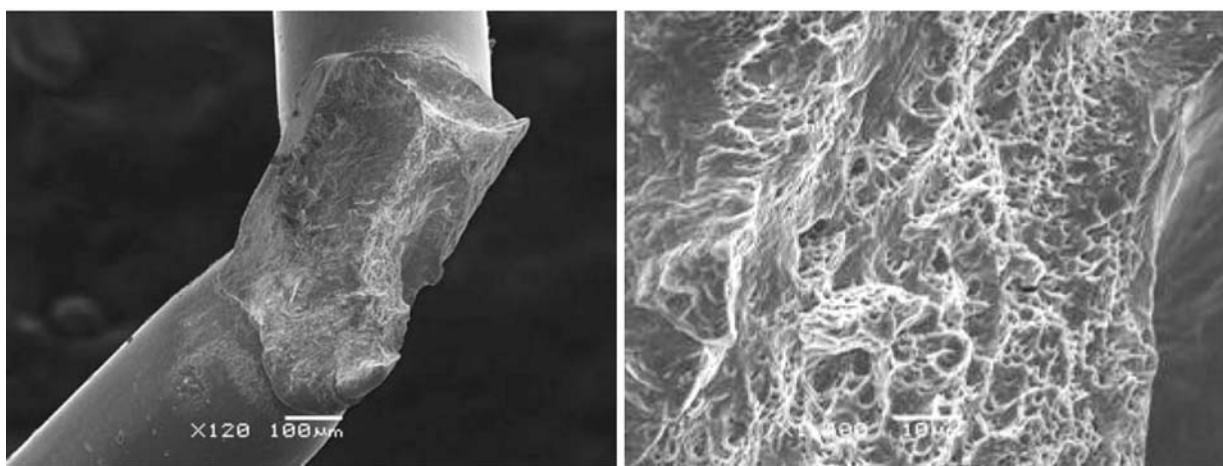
Fracture surfaces for weld made using 120 A and 1.5 kg-f weld force.
